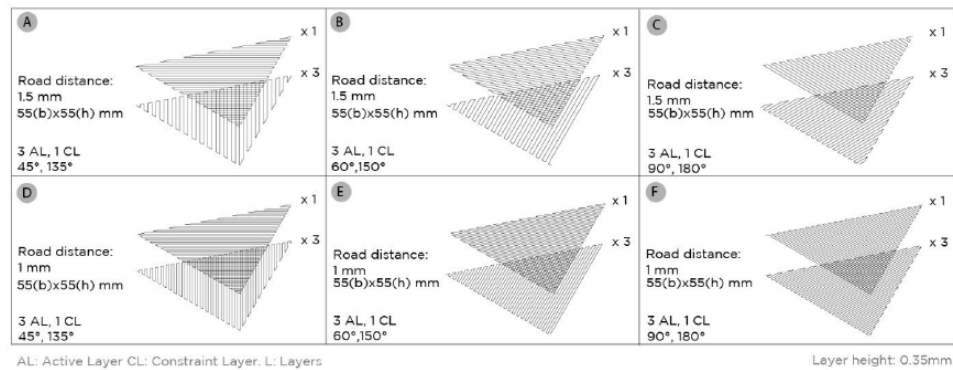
Toolpaths of six bilayer composite samples to be printed with wood filament.
